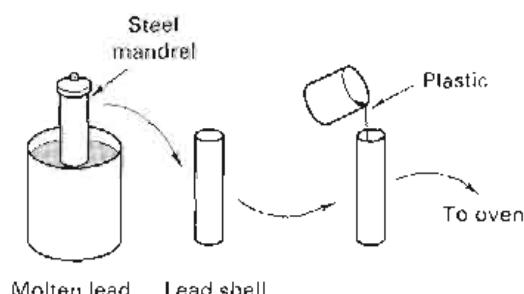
Steps in the casting of plastic parts using a lead shell mold.
